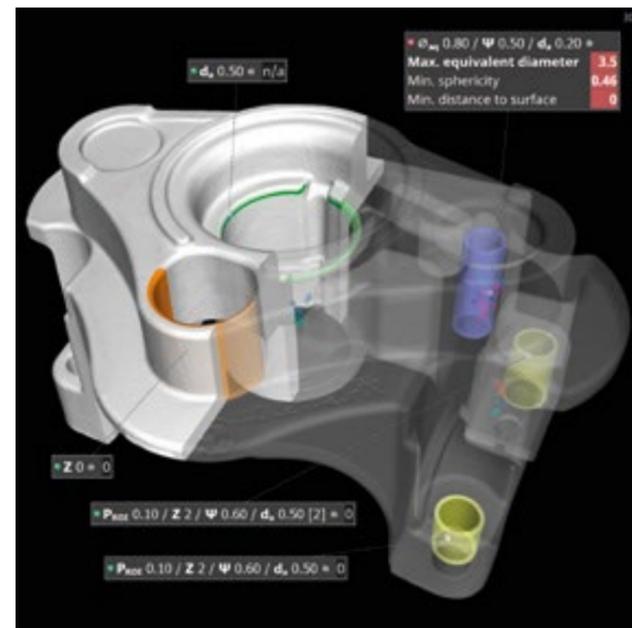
CT inspection allows users to recognise and characterise porosity in three dimensions.
